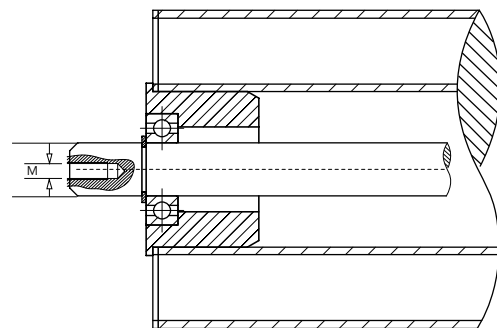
Example of through-shaft with smaller head and locking ring
